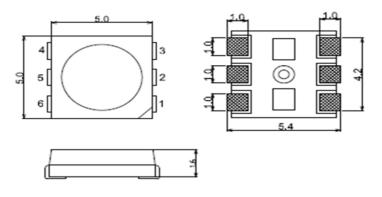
IN-PC55TBTRGB Package Outline Dimensions
